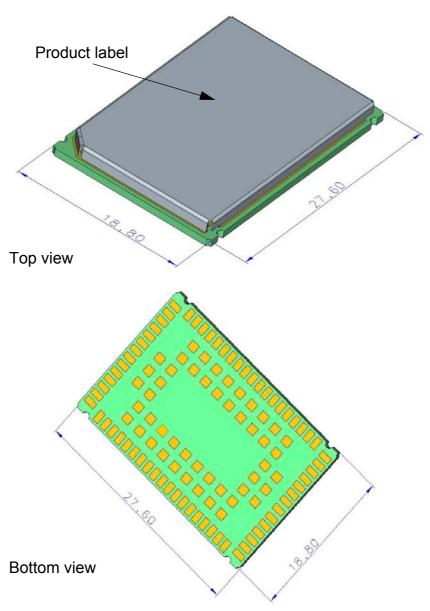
ELS31-VA/ELS51-VA- top and bottom view
